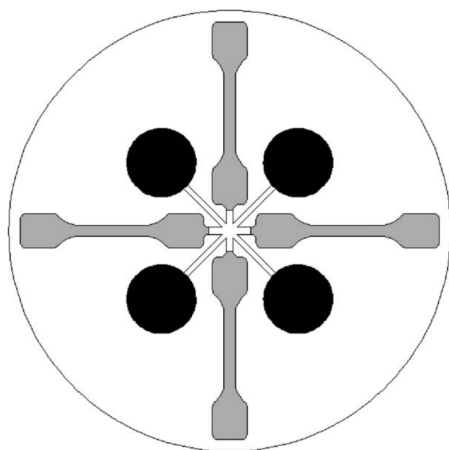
Example of the mold used in the RMX ($25 - \text{mm}$ diameter disks and dog-bone-shaped specimens, ISO 527-2-5A).
